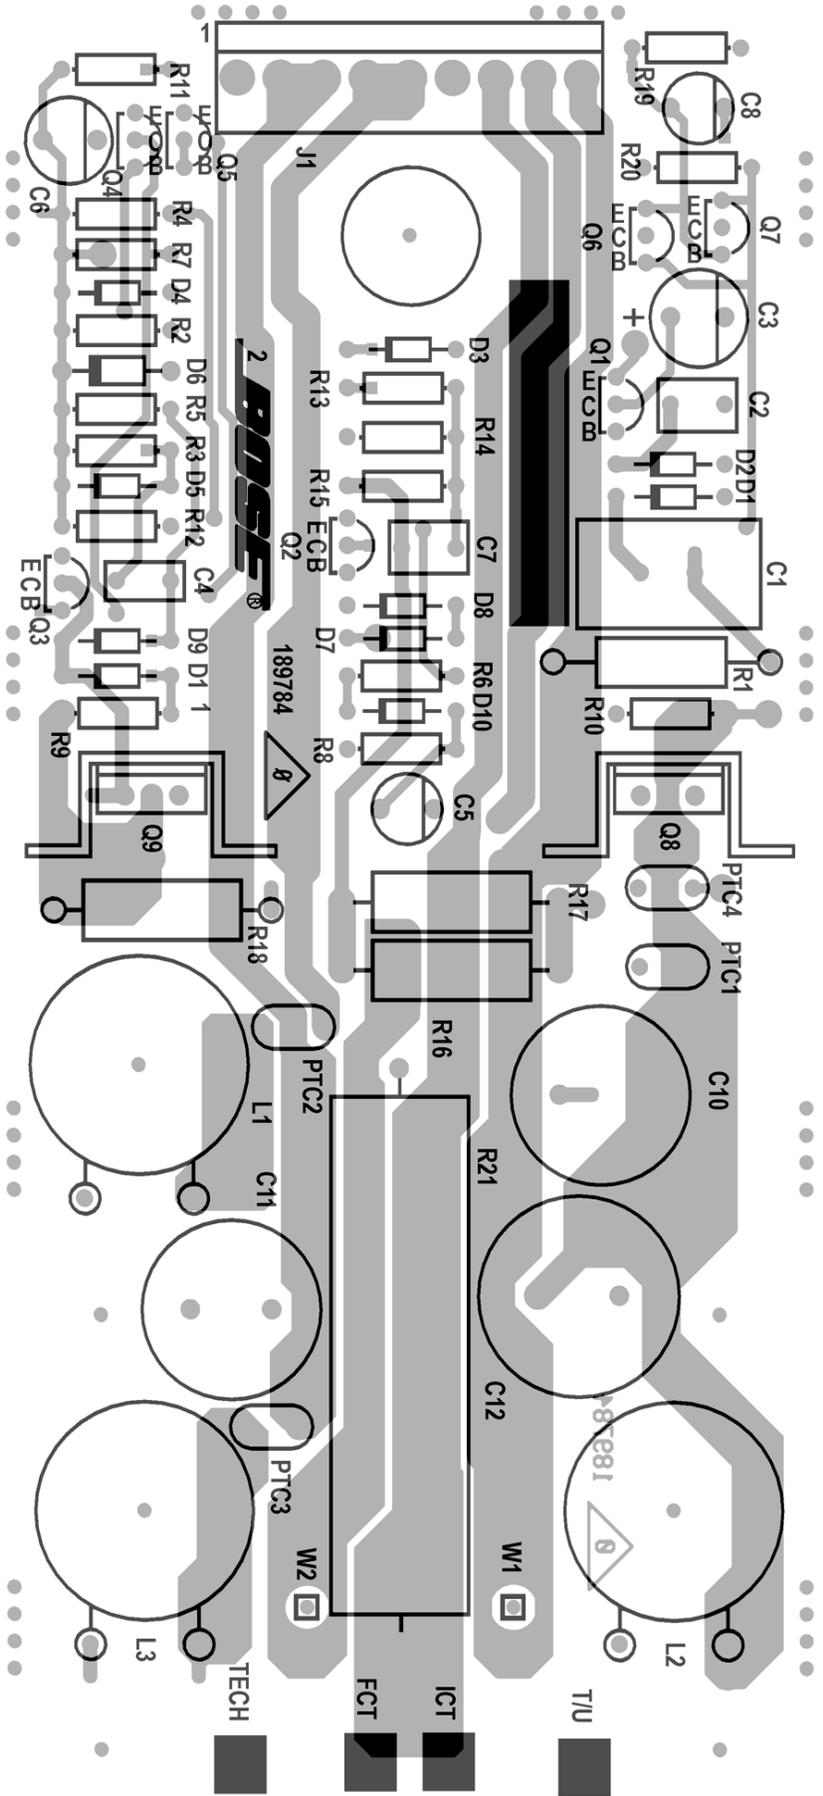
Model 500PM Loudspeaker Crossover PCB Bottom Side Etch Layout Diagram
